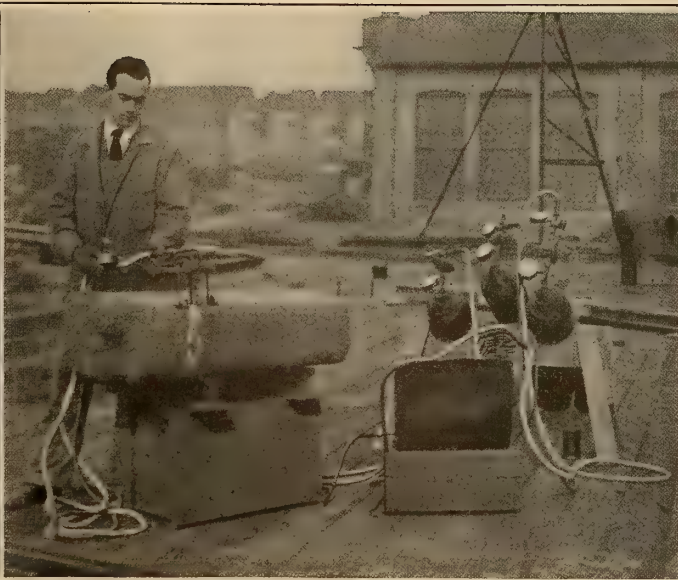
PLATE-CUTTING MACHINE, CUTTING A 24-INCH STEEL BILLET
